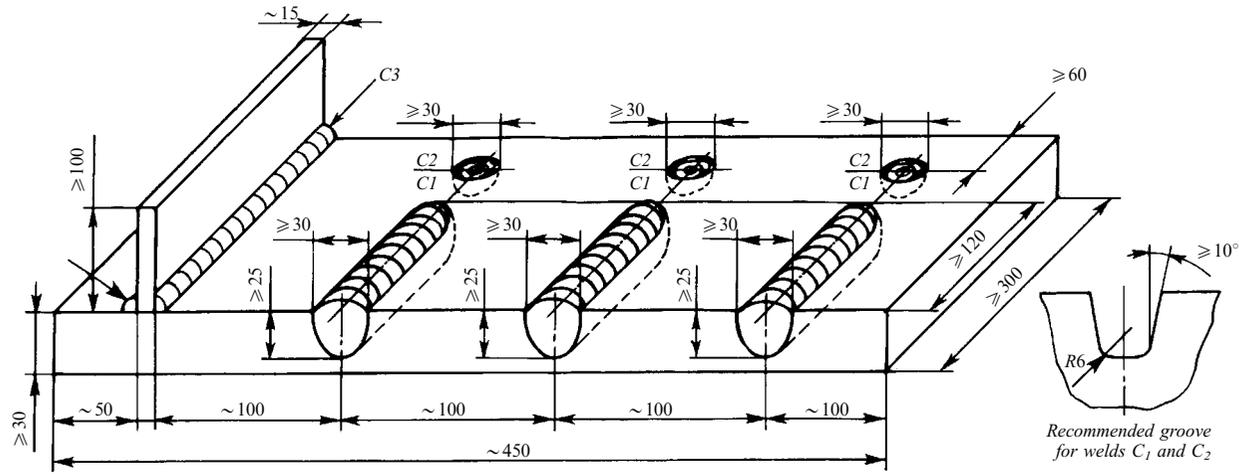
Test piece — simulator P₈ of castings and forgings repair
